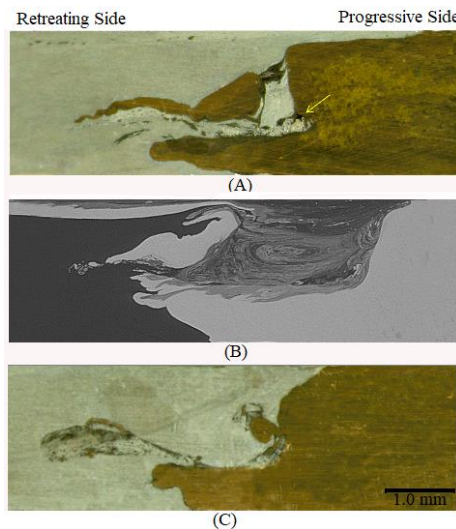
Welding macrostructure of samples (d), (e), and (f)
